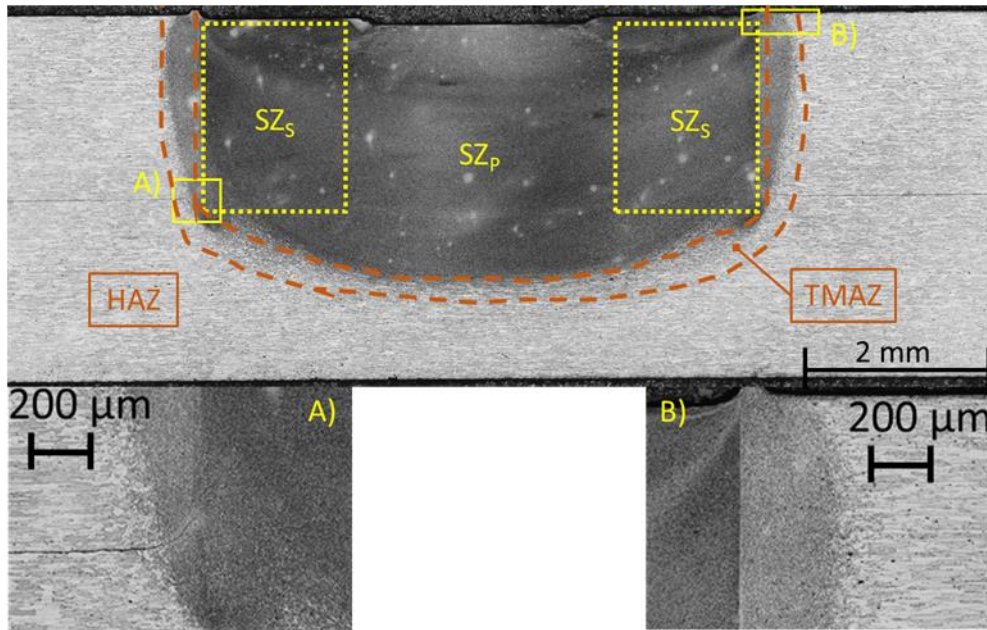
Cross-section of RFSSW AA7075-T6 performed with welding condition W21 (RS = 1000 rev/min; PD = 2.4 mm):
